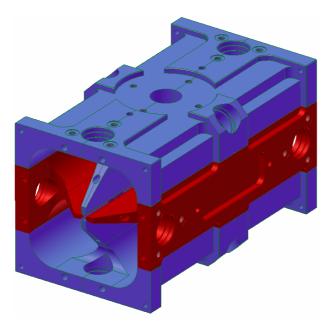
CAD drawing of the design used for fabrication of the 4-vane cold model.
